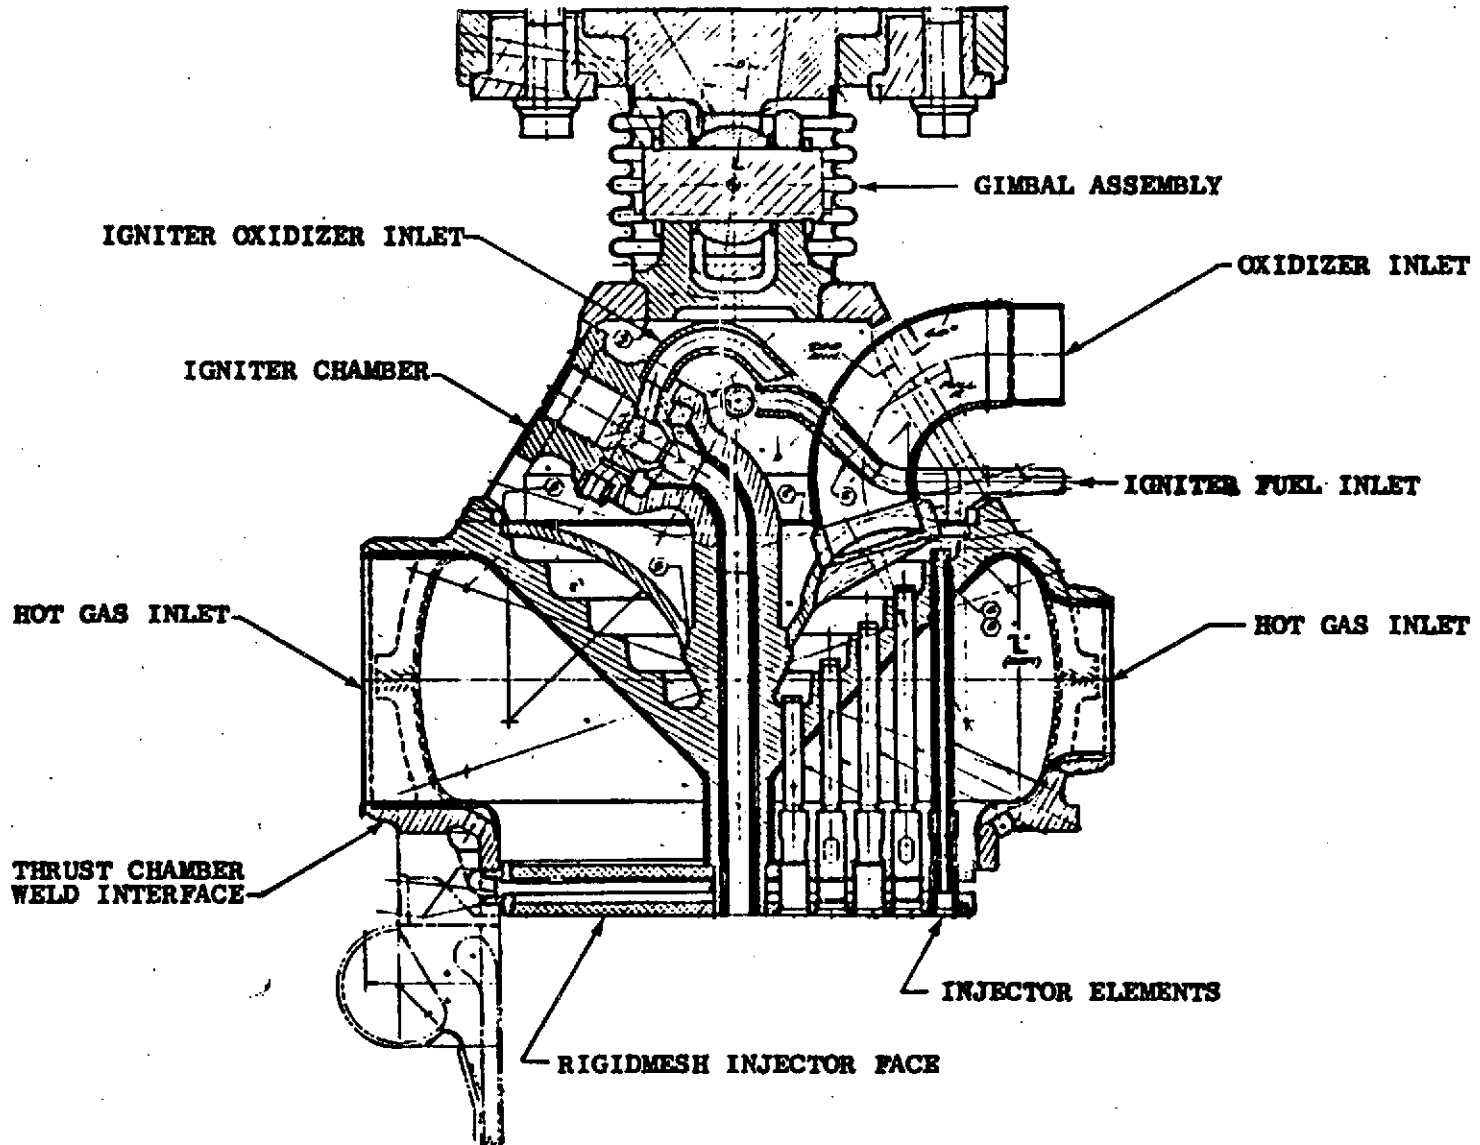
Thrust Chamber Injector and Gimbal Assembly
